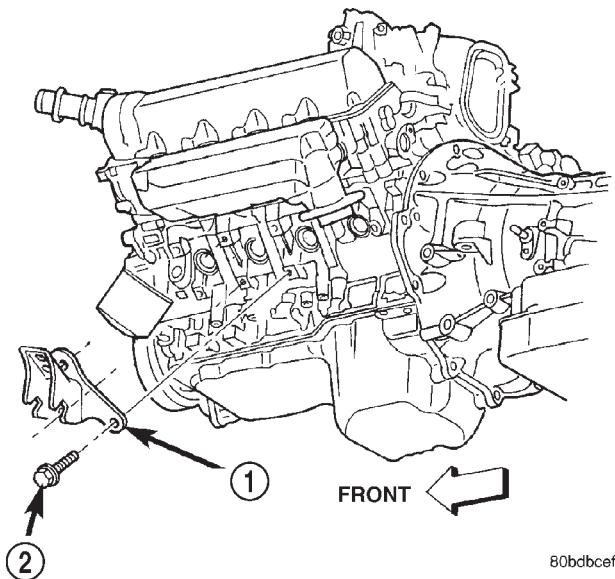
Engine Insulator Mount 4x4 Vehicle—Left Side
